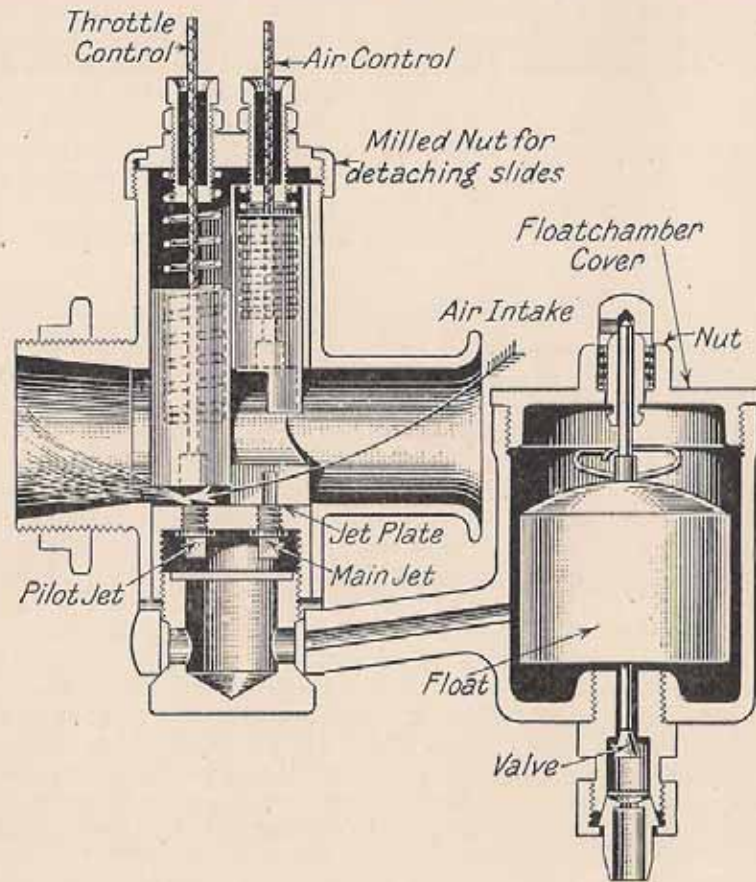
SECTIONAL VIEW OF BINKS CARBURETTOR
